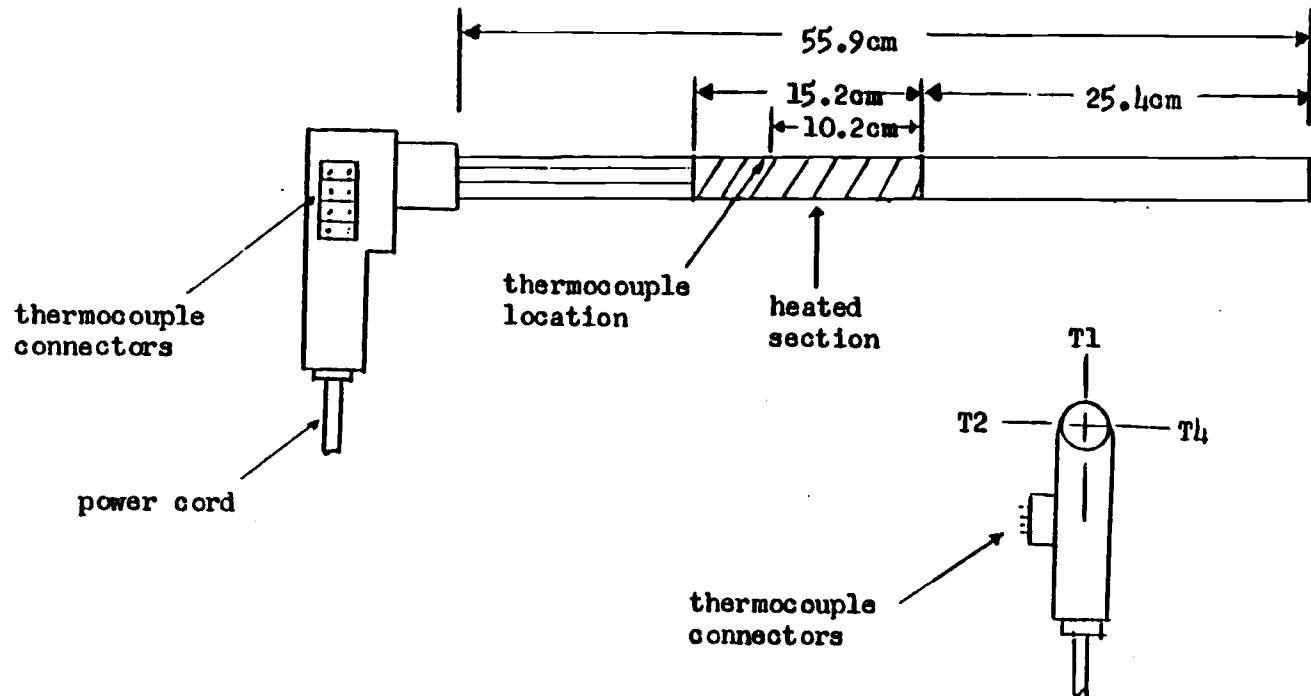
Heater Rod, Heated Section, and Thermocouple Locations.
